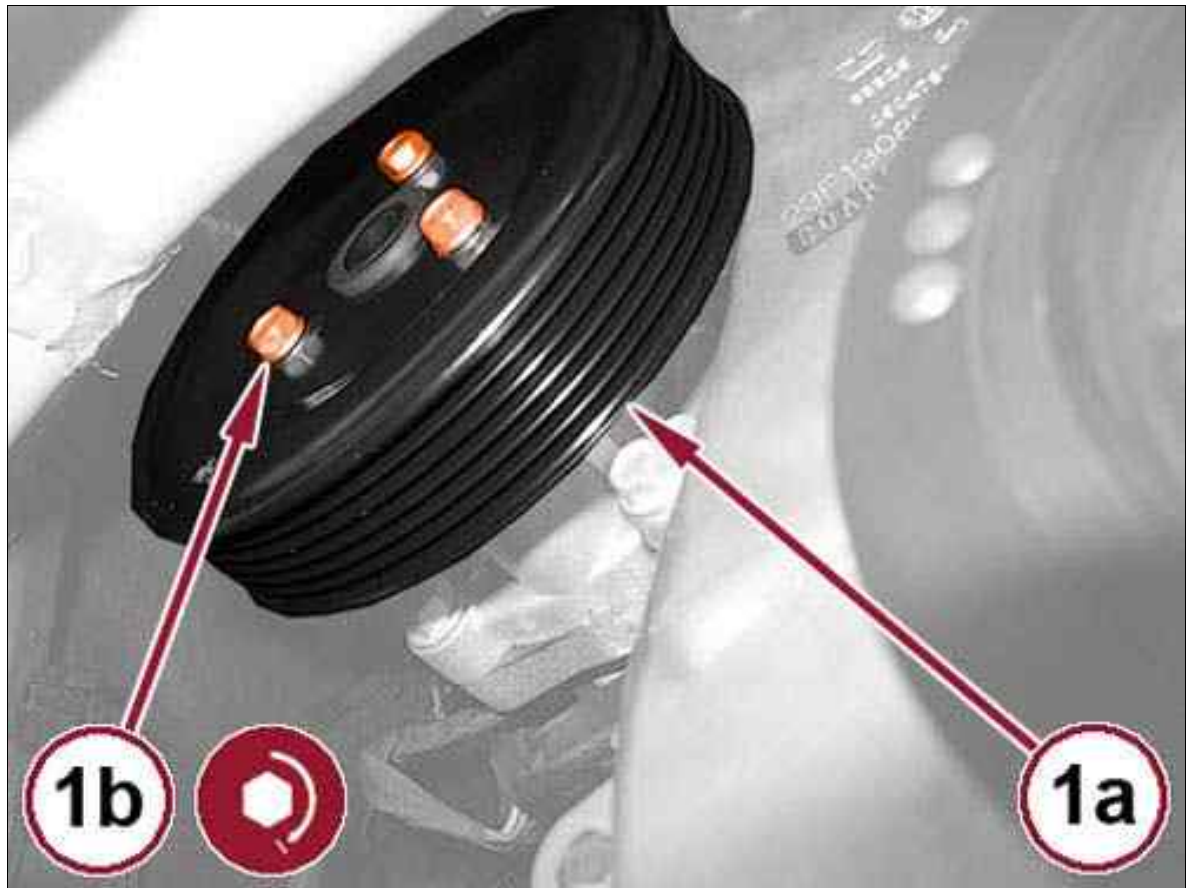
Accessory Drive Belt Idler Pulley & Bolt
